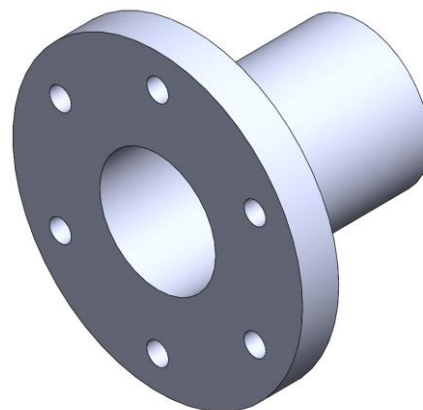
Inside face of the motor housing, that will be connected to the outside of the motor side lid.
